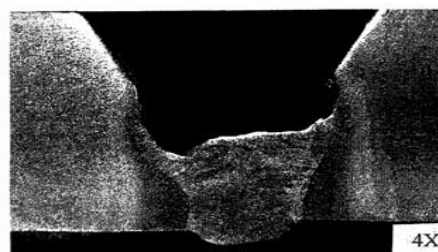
Macro photograph of the weld joint produce using E6010 electrode
